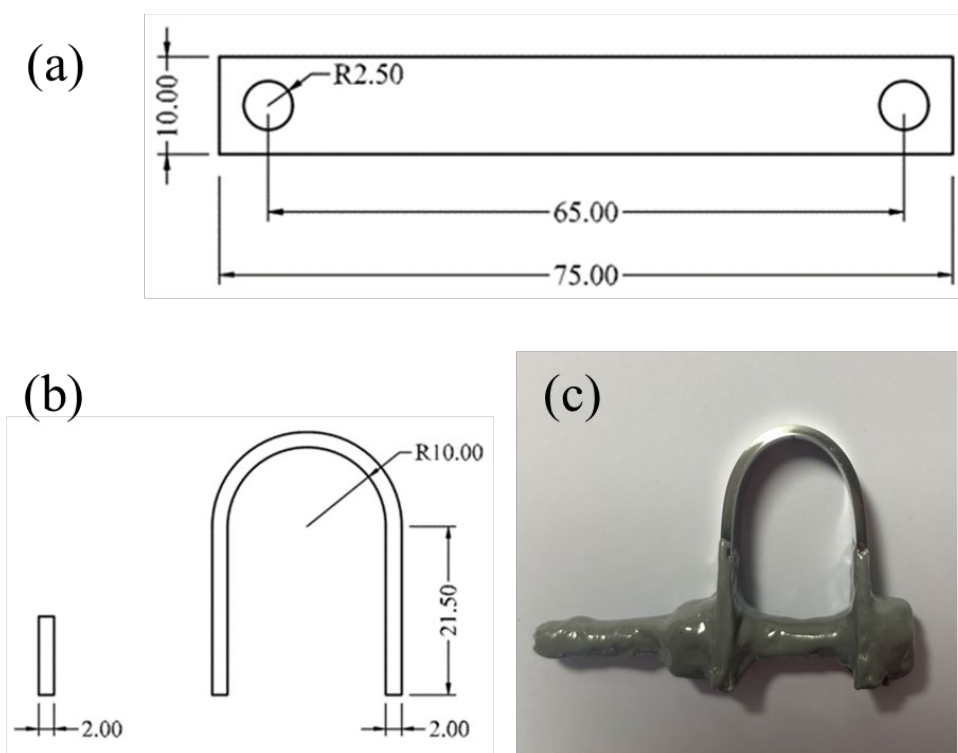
Schematic of X80 U-bend coupons: (a) dimensions of unpainted X80 U-bend coupon before bending (in mm), (b) dimensions of X80 U-bend coupon after bending (mm), and (c) X80 U-bend after coating for immersion testing.
